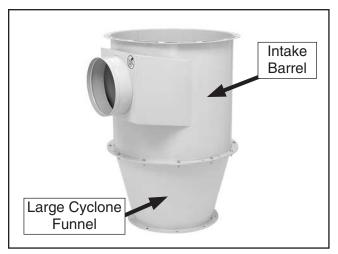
Intake barrel and large cyclone funnel mounting holes aligned.
